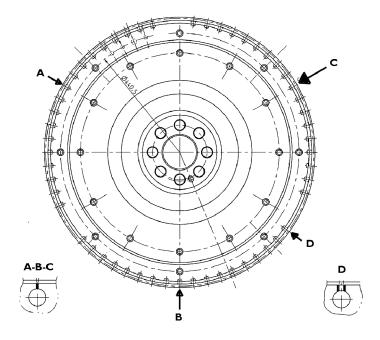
### DETAIL OF PUNCH MARKS ON ENGINE FLYWHEEL FOR PISTON POSITIONS
